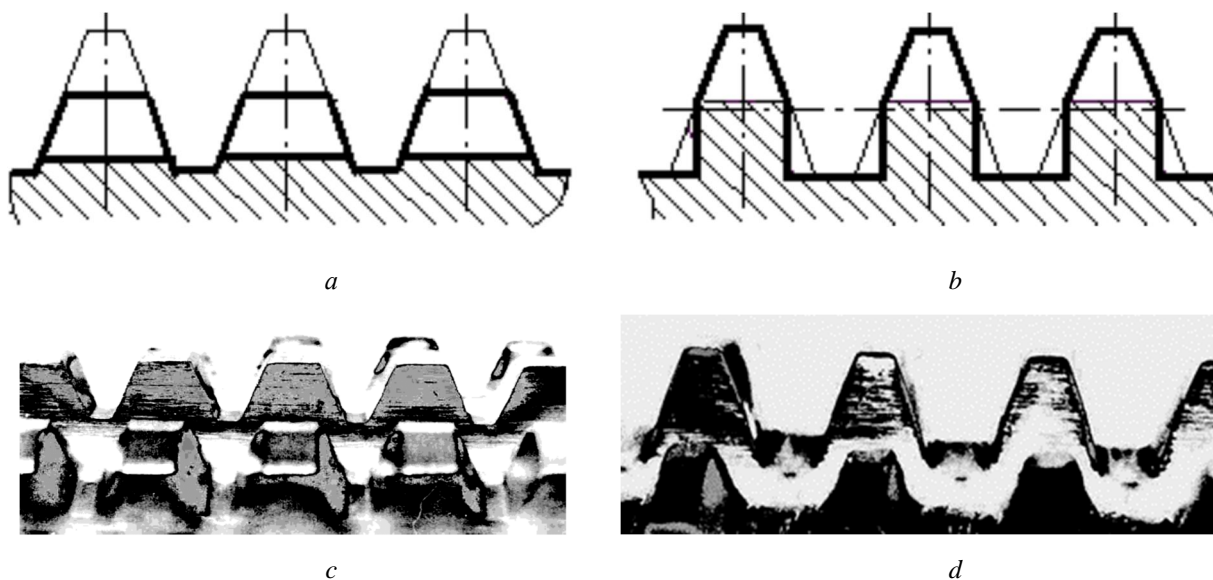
Hob column design (a, b) and photos (c, d) of hobs with split base rack for first (a, c) and second (b, d) pass machining of gears with a large module
